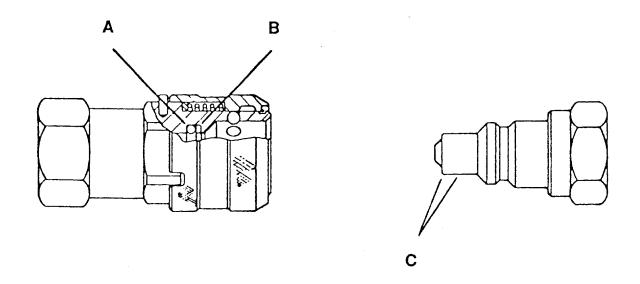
HYDRAULC COUPLER SET, 110440
